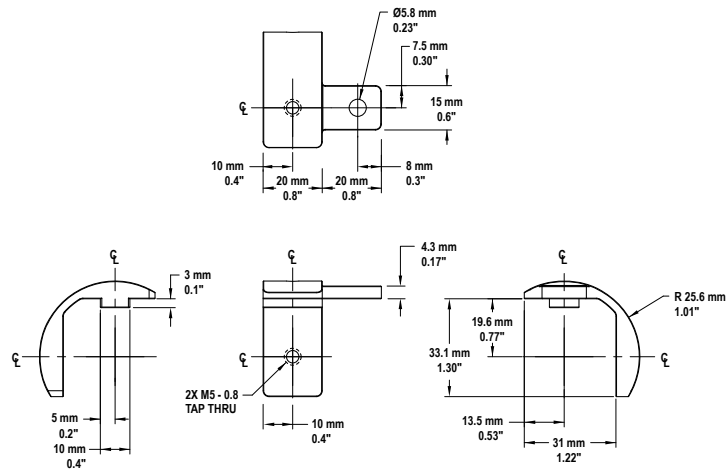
Standard Center Bracket LSHDCMB-1, for sensors 750-1050 mm long. Supplied Qty: 1
